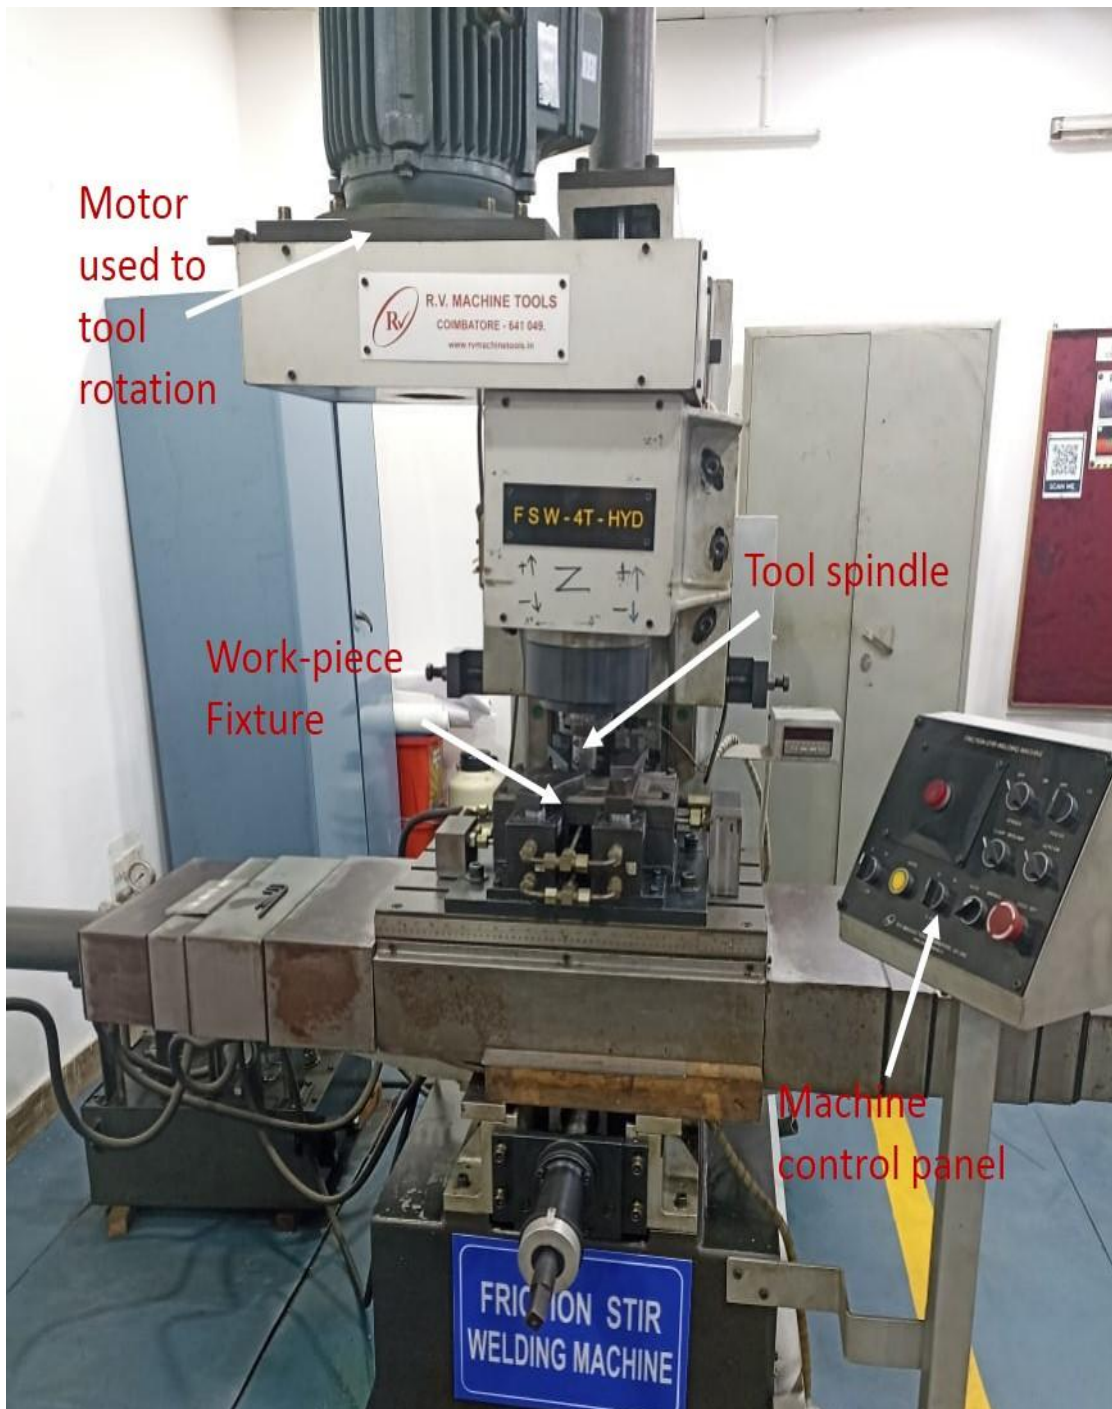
Friction stir processing/welding machine used for experimentation
